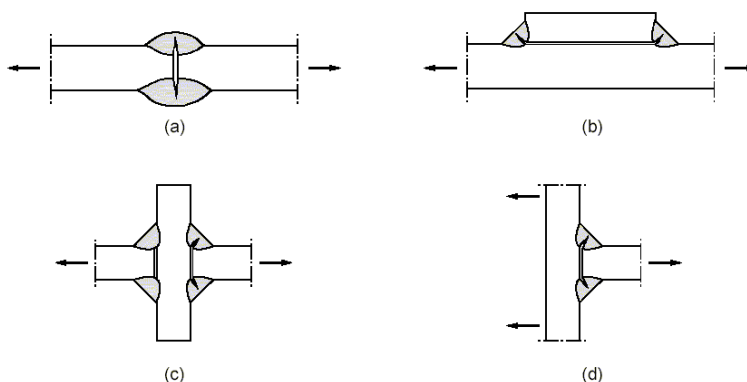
Examples of details for which the improvement in fatigue strength is likely to be limited by the occurrence of root cracking. To ensure that a significant increase in fatigue strength is obtained full penetration welds should be used in case a), c) and d), while an extra large weld throat should be used in case b).
